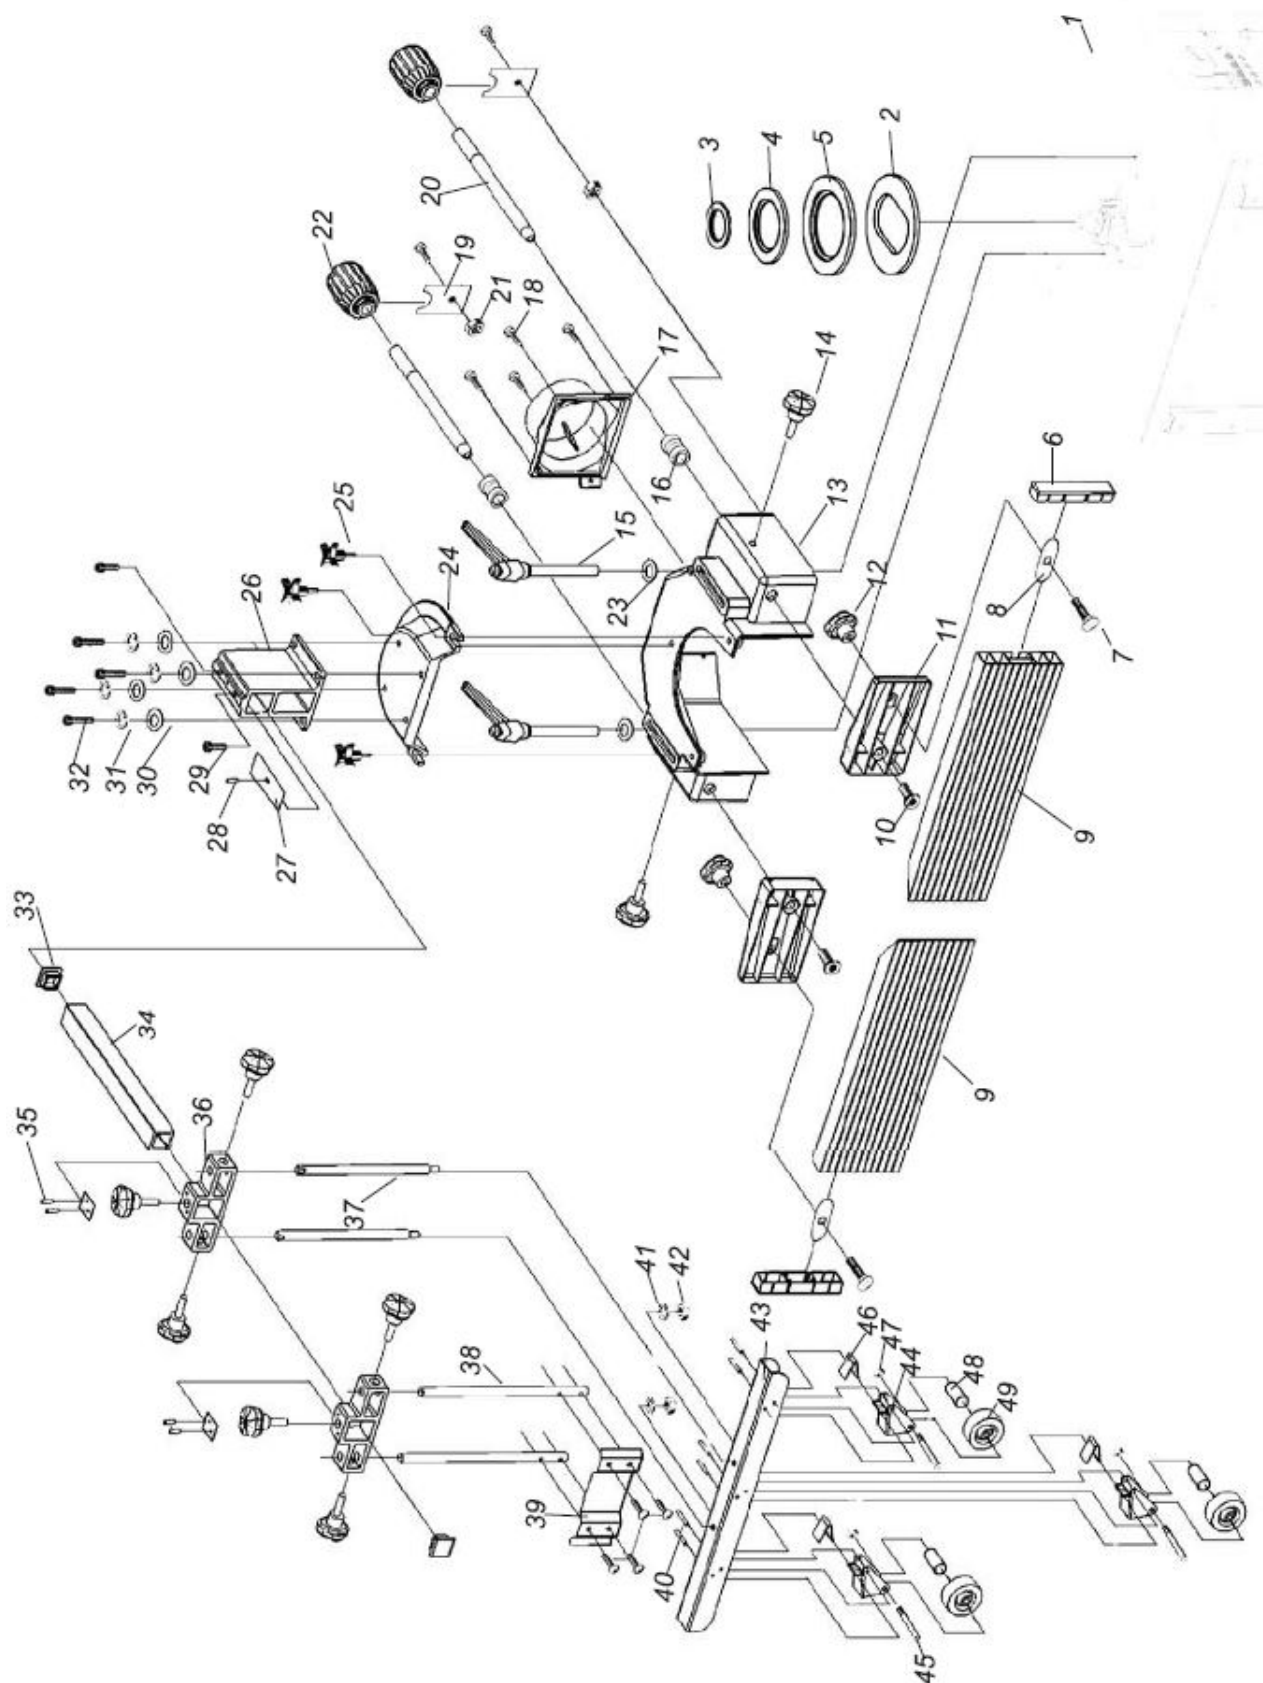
Spare parts drawing 2 - Table router TF 190 SE
